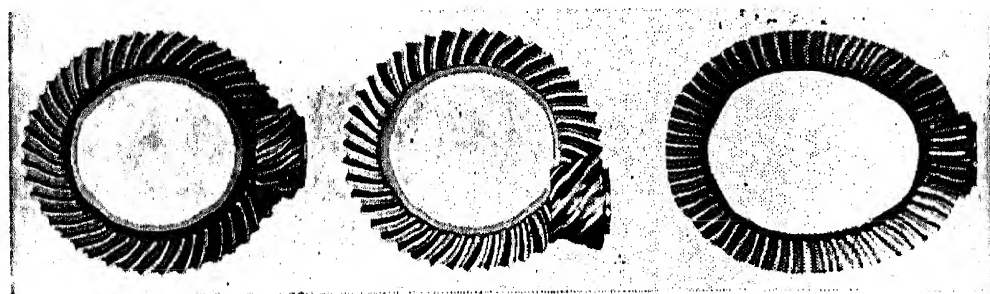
A spiral bevel, hypoid, and Zerol bevel gear. (Courtesy Gleason Works.)
